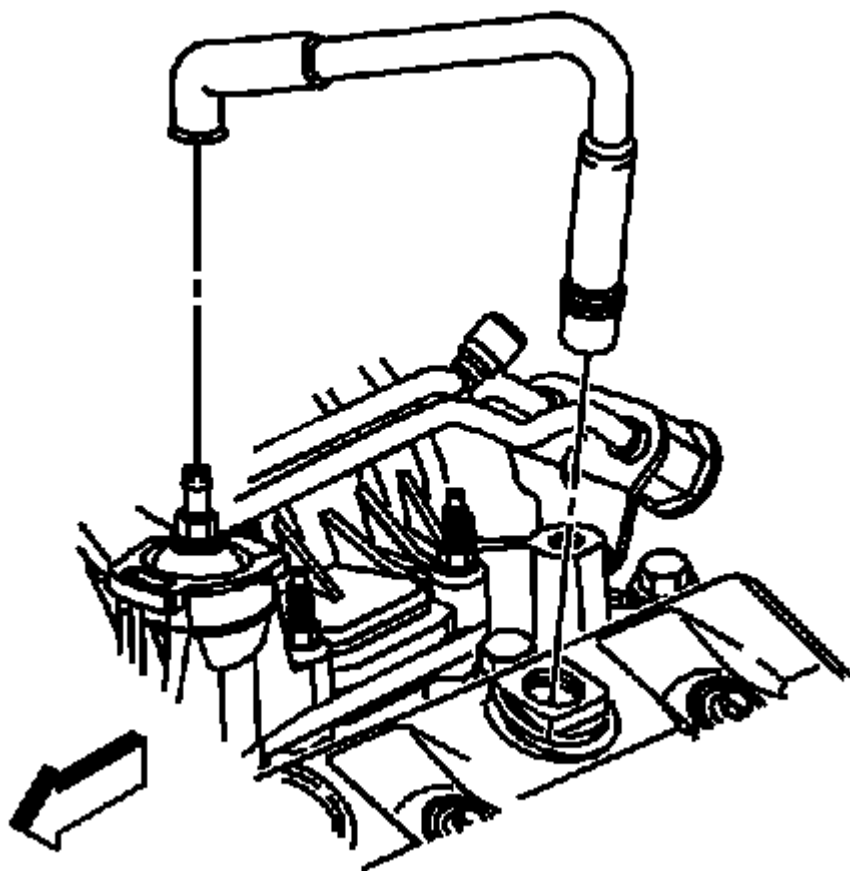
Locating PCV Valve Hose At Valve & Rocker Cover
